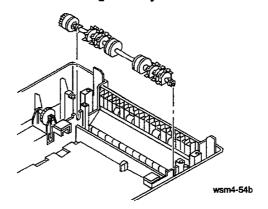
Removing the Tray 2 Feed Roll Assembly
